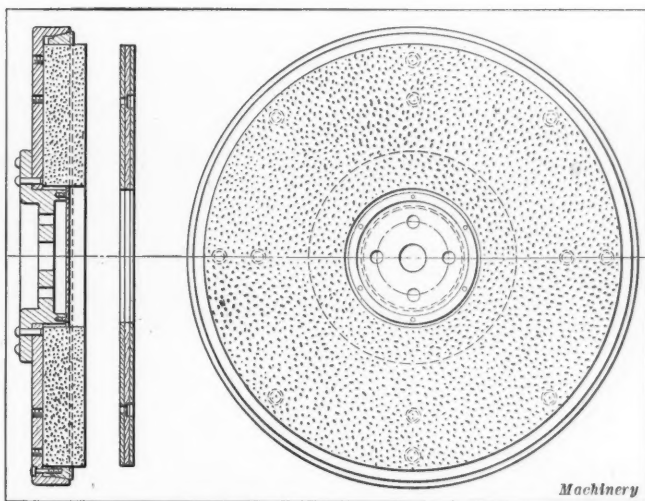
Construction of Pressed Steel Chuck used on Besly Grinder
